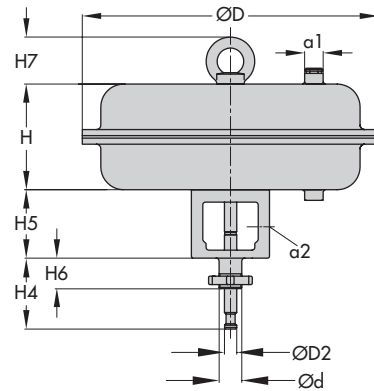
· Type 3277 (700 cm² version with lifting ring)
